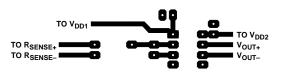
Bottom Layer of Printed Circuit Board Layout.
